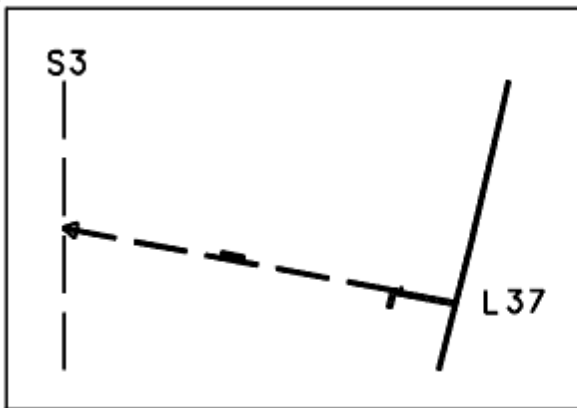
24. Stiffener between profile section and stiffener on the panel.
